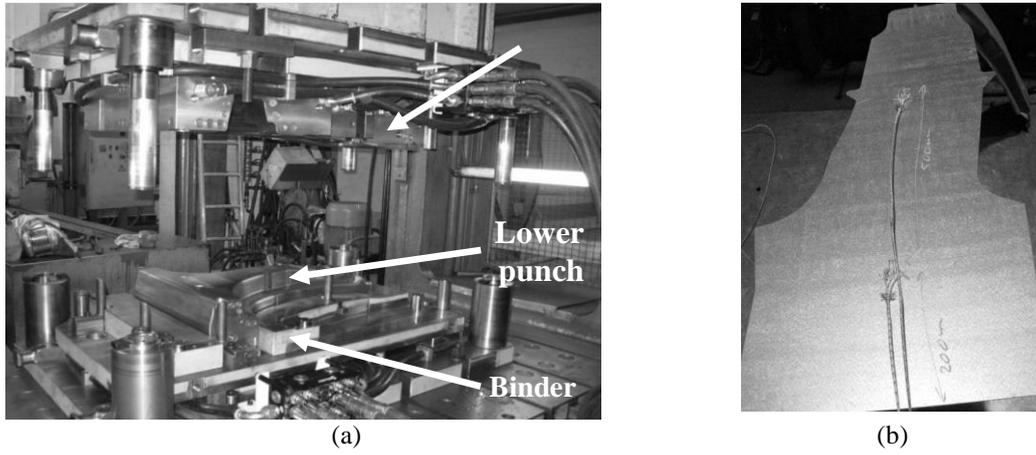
(a) Hot-stamping tools mounted on the hydraulic press, (b) Thermocouples installed in the blank.
